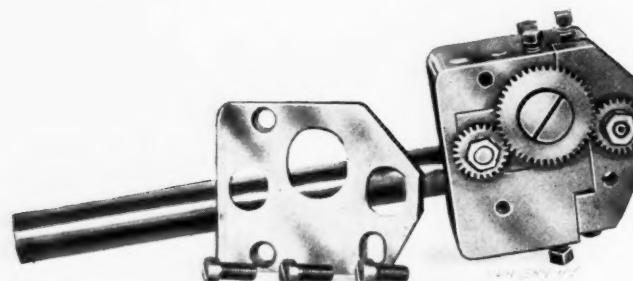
Rear View of Generating Tool with Gear Guard Removed.
